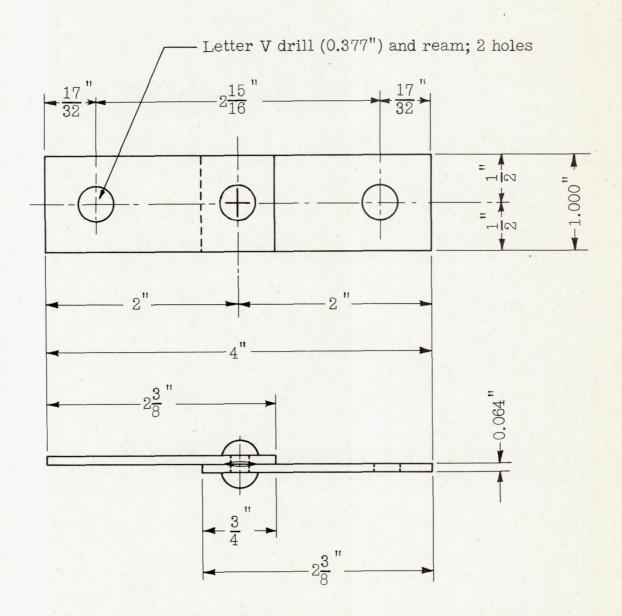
Riveted specimen, 0.064-inch-thick (14-gage) sheet. Maximum rivet size, $\frac{3}{16}$ -inch diameter.
